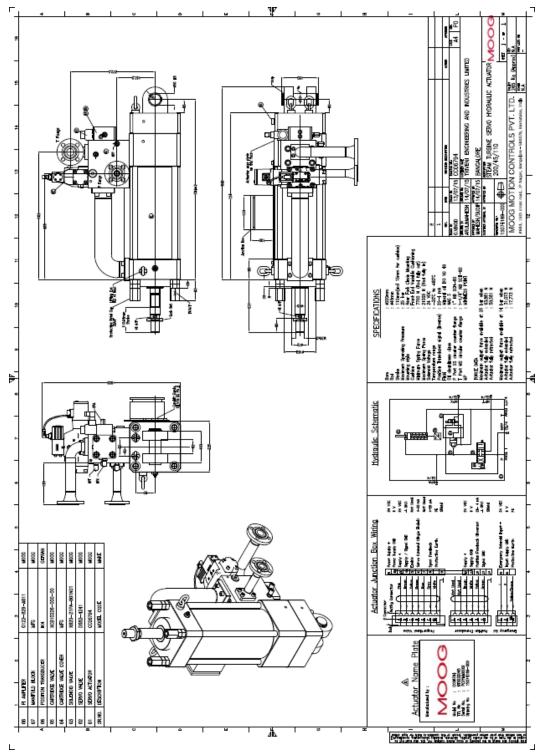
Actuator Installation Drawing Note: Please refer the installation drawing attached separately at the end of this O & M.
